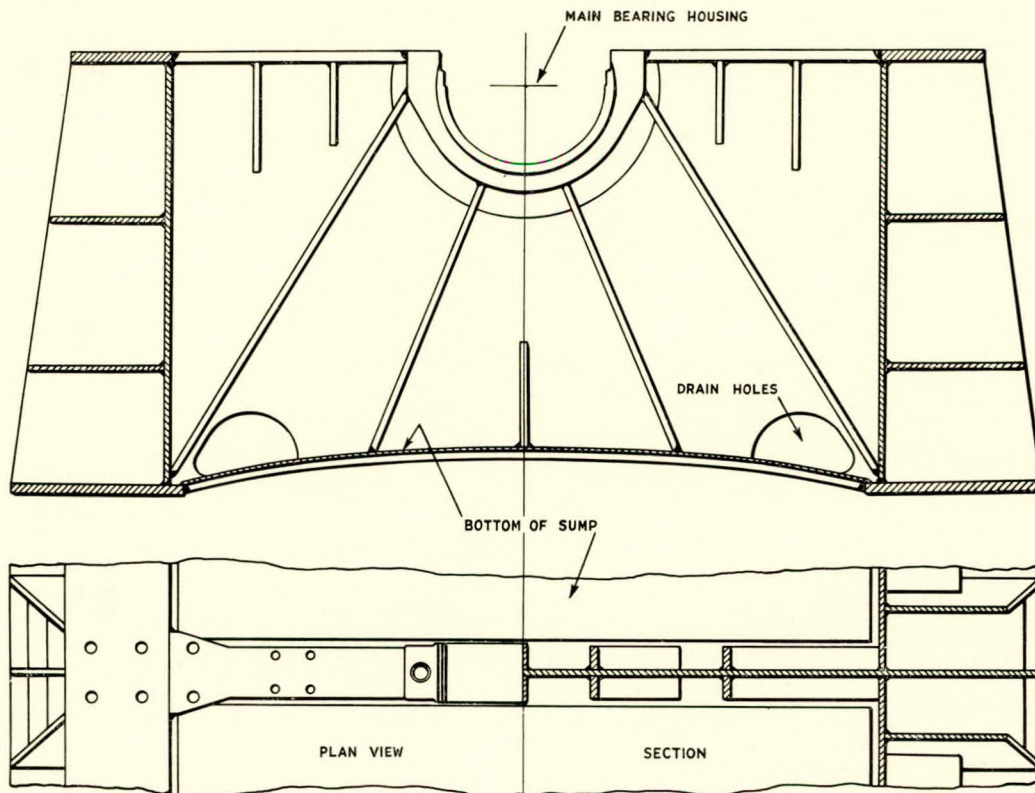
Transverse section of bedplate, 750/2,000 P.I. engine
